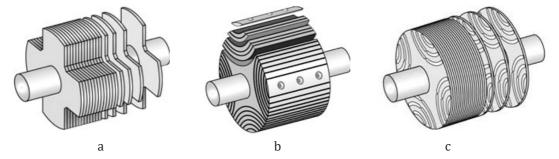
Rotor design of synchronous reluctance motor: a – with projecting poles; b – axially laminated; c – cross-laminated.
